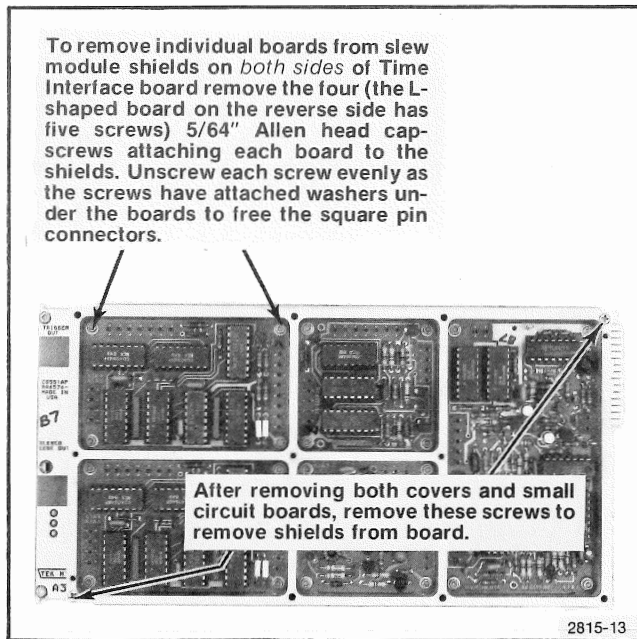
Outside of Time Interface board. Although only one side is shown, small board removal instructions are identical for both sides.
